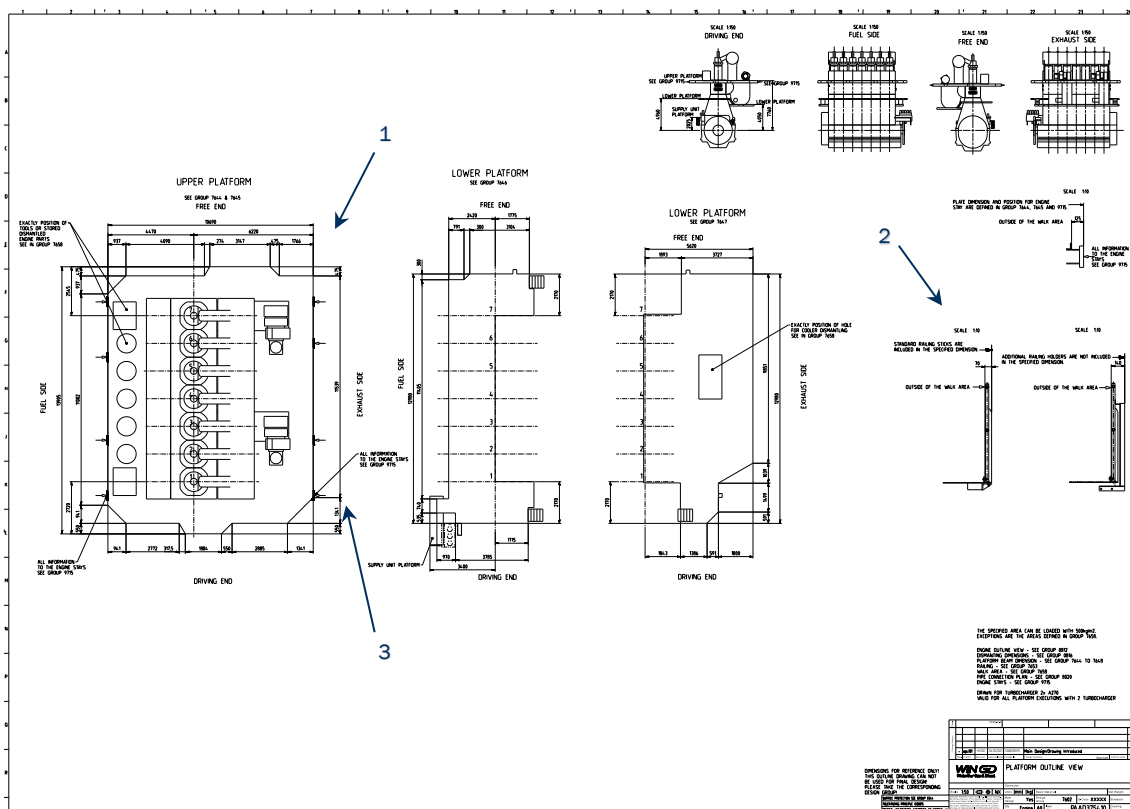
Example drawing of a new Platform Outline View (DG 7602-02) for a 7X82-2.0 engine
